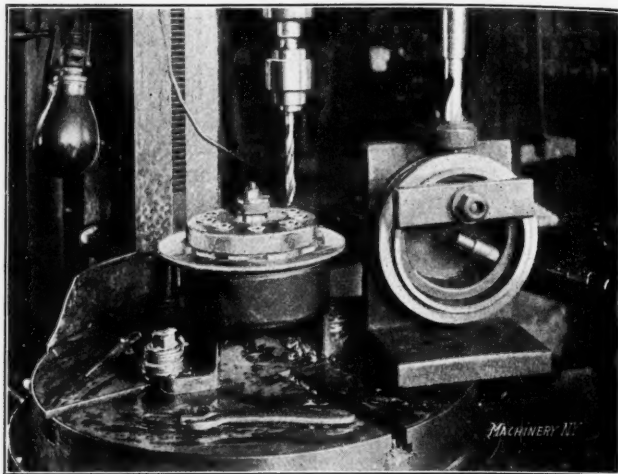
Drilling the Three Oil Supply Holes in the Case (see Fixture at the Right), and Drilling the Bolt and Pivot Holes in the Cover
